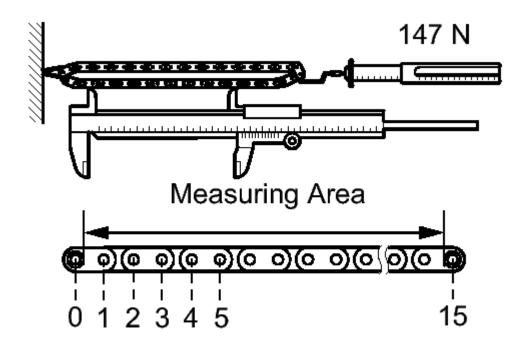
Measuring Length Of Pins Using Vernier Caliper
